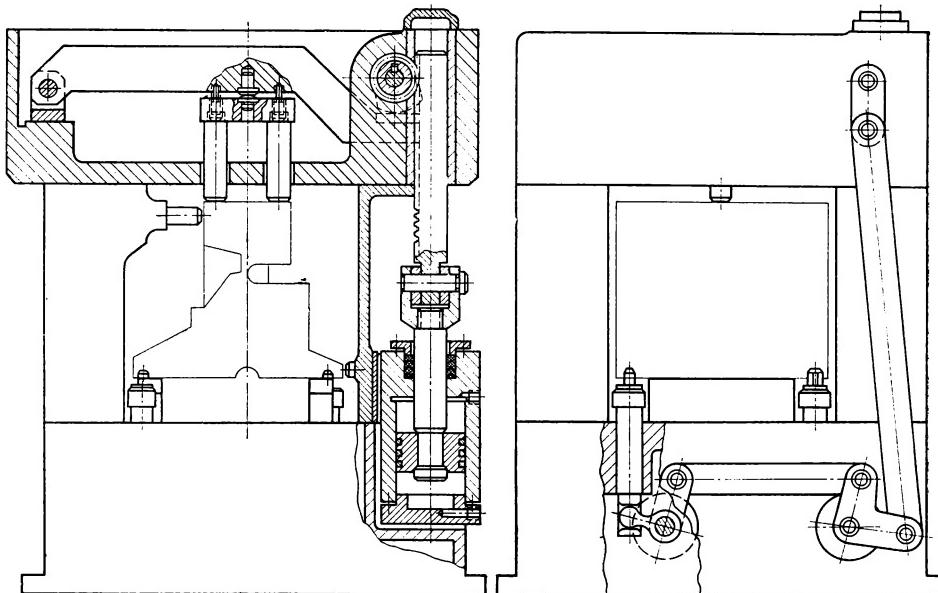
Fixture for locating and clamping a cylinder block by means of a cam
